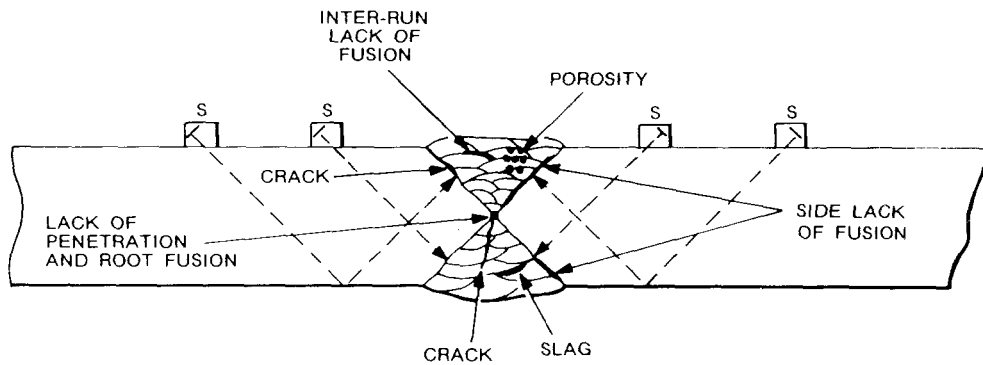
ULTRASONIC CRACK DETECTION ON A BUTT WELD
